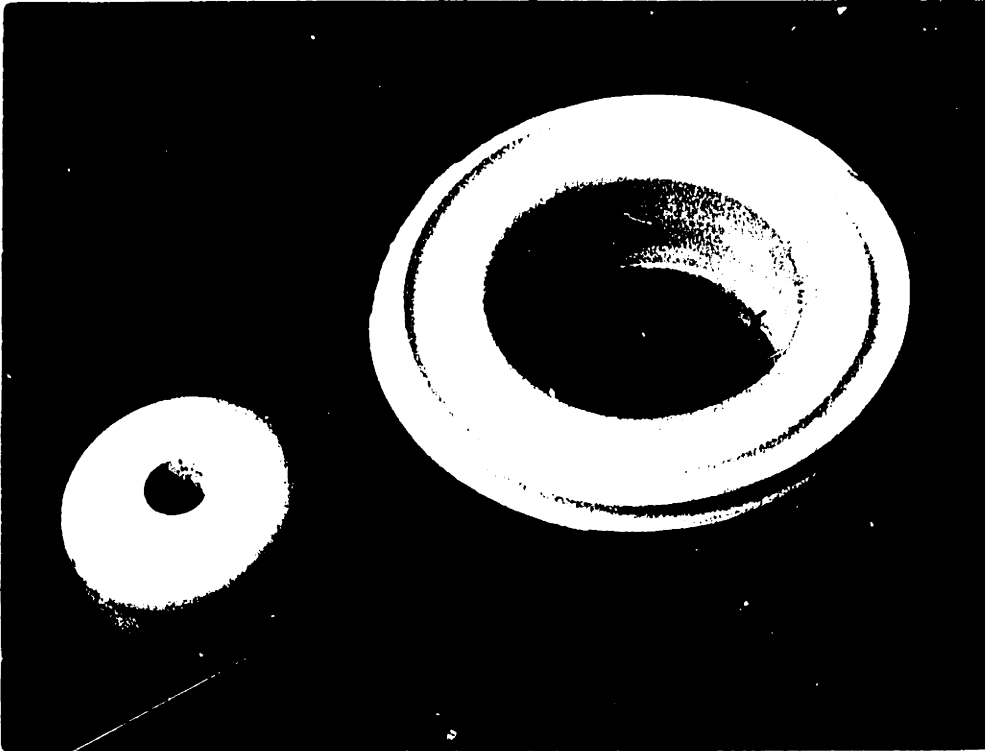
Top gypsum mold and upper core for rotor-hub molding
